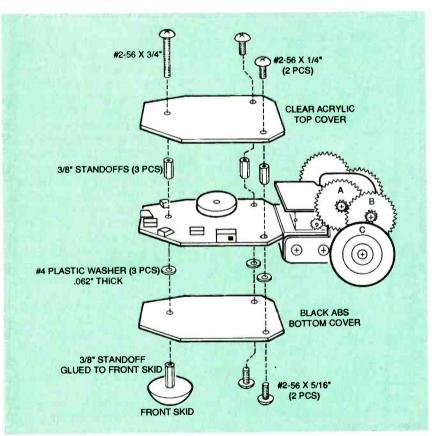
MOUNT THE TOP AND BOTTOM COVERS and front skid as shown here. To align the two motor gears, loosen the top screws and adjust the position of the motors.
